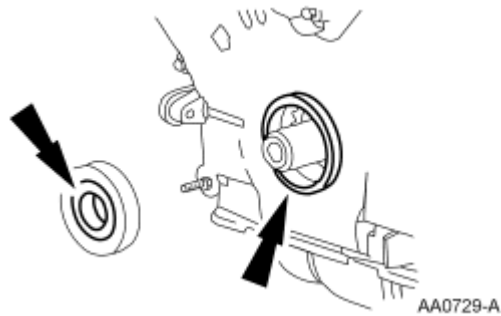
Lubricating Engine Front Cover And Crankshaft Front Seal Inner Lip
